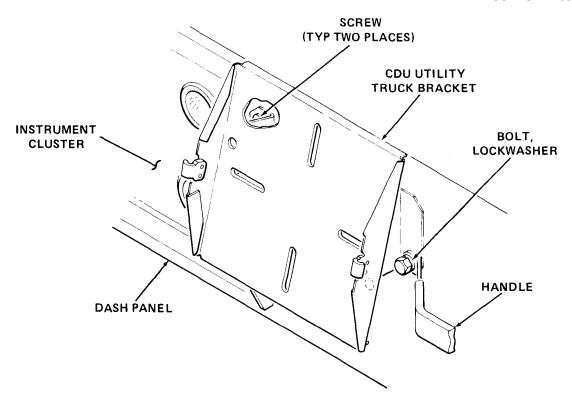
CDU Bracket Installation in Standard Utility Truck
